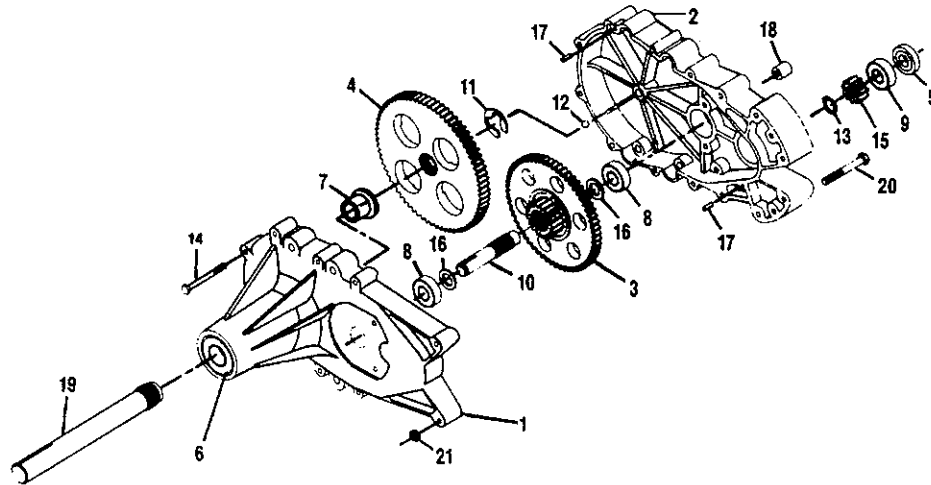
A - DETAIL PARTS LIST FOR 166204
